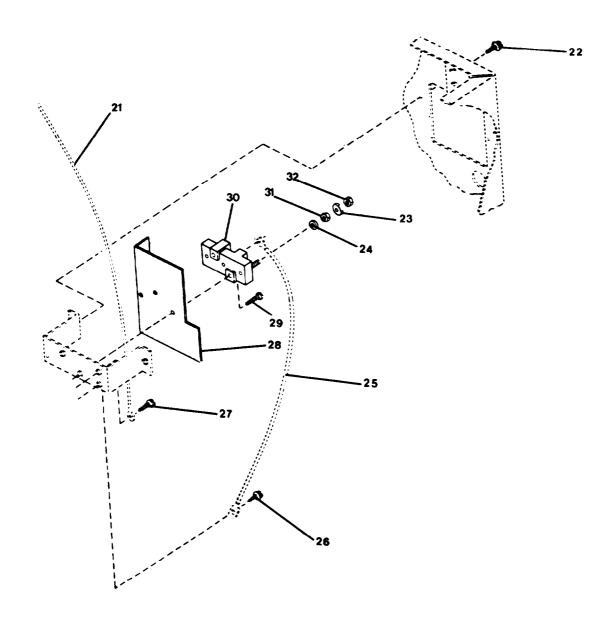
Dryer Rear Bulkhead and Cylinder Roller Group (Sheet 2 of 2).
